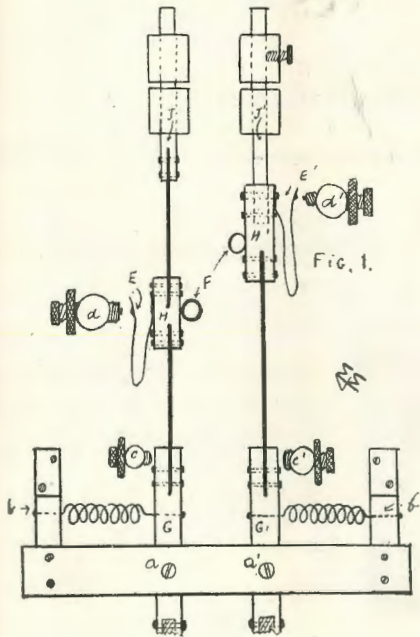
shows the completed job, and Fig. 2 the pivot and pivot-mounting assembly. Good brass is sawn out, and tapped as per sketch. The pivots here used were the shafts of alarm clock wheels, which was primarily despoiled to get at the mainspring, which provides the spring throughout the job.
